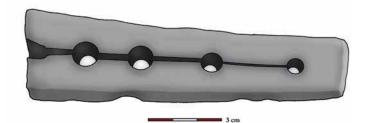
Drawplate from Altena, Germany, consisting of holes of diminishing sizes. There is a groove between the holes, probably to store lubrication to aid the drawing action. This feature makes it almost certainly a drawplate and not a nail iron (drawing M.A. Wijnhoven).
